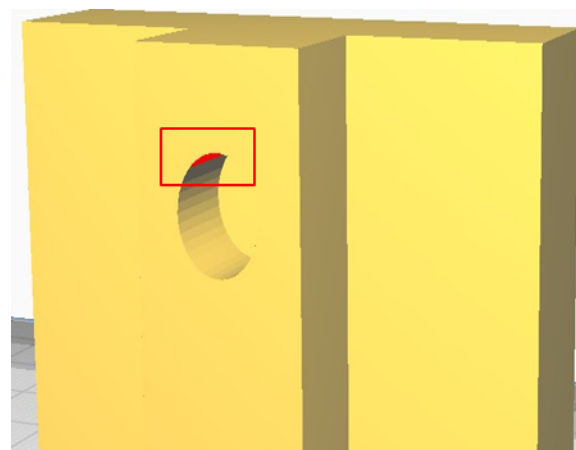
Example of inner dimension has 2 mm chord height in red frame
